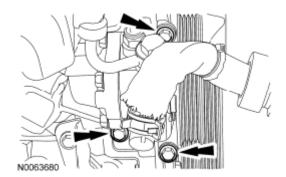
Locating Power Steering Reservoir Nuts Courtesy of FORD MOTOR CO.
